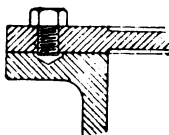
Tapped hole for forcing-screw, closed by set-screw when out of use.
